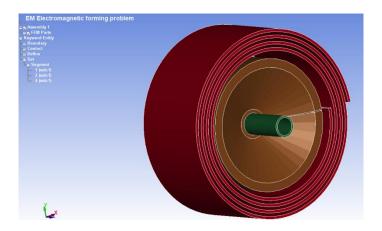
Front view consisting coil, field shaper, and tube in workpiece.
